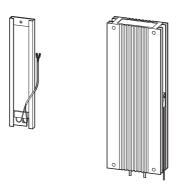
Braking resistor design examples: DX-BR3-100 (left), DX-BR100-100 (right)
